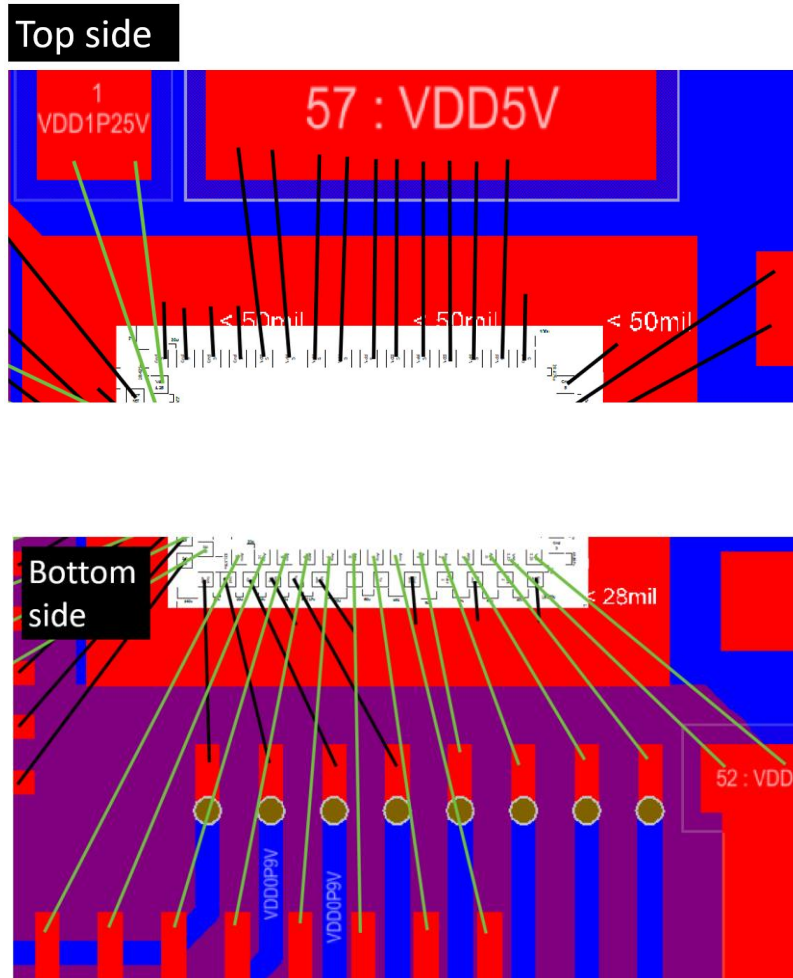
, The bonding diagram on the top and bottom of the PCB
